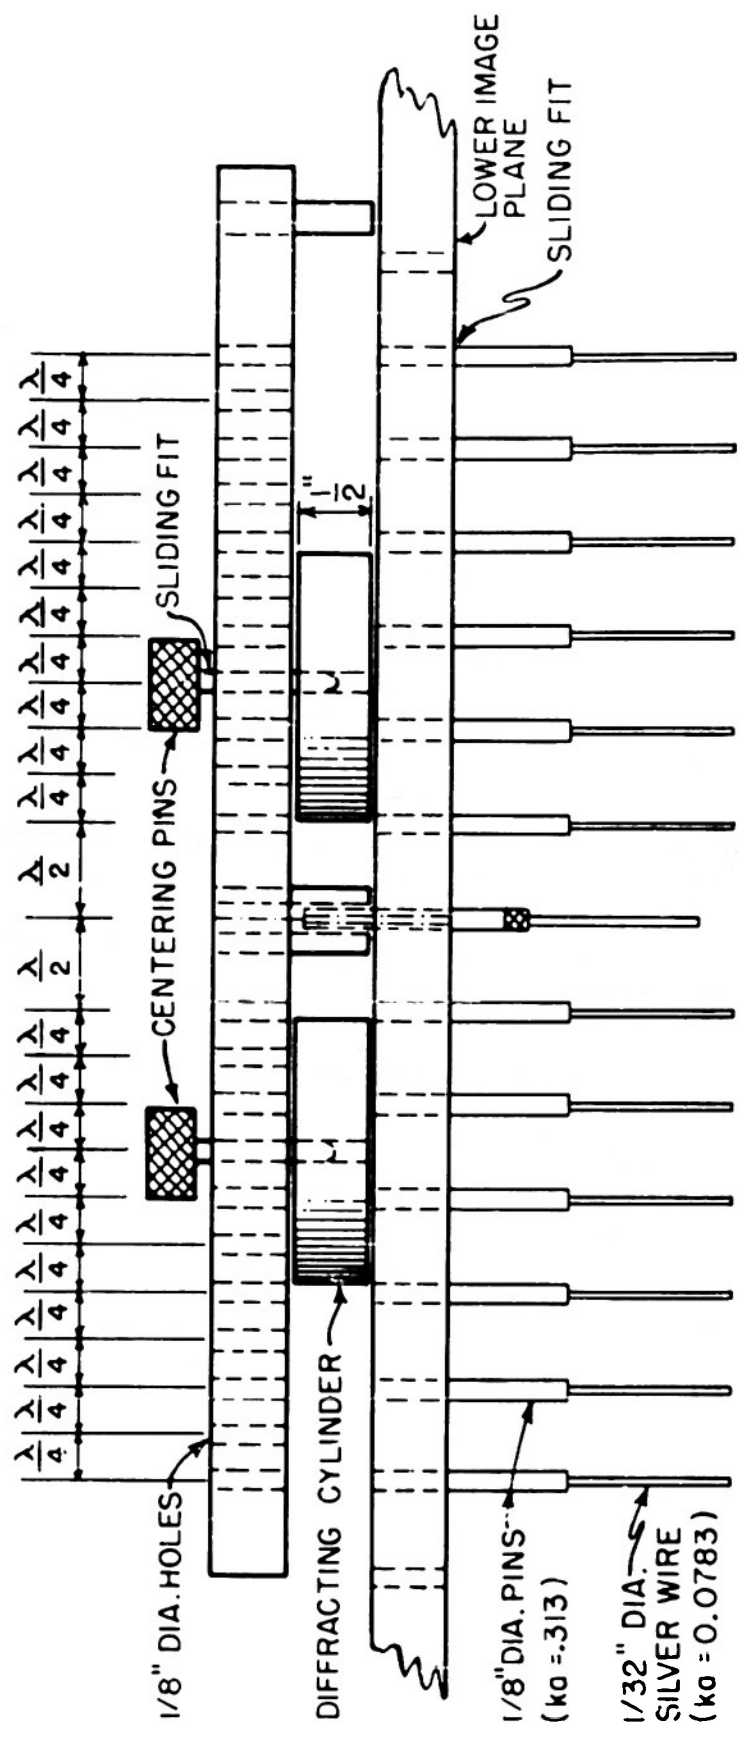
CROSS SECTION OF RETRACTABLE PINS AND ADDITIONAL SPACING BAR FOR LOCATING DIFFRACTING CYLINDERS IN PARALLEL PLATE REGION
